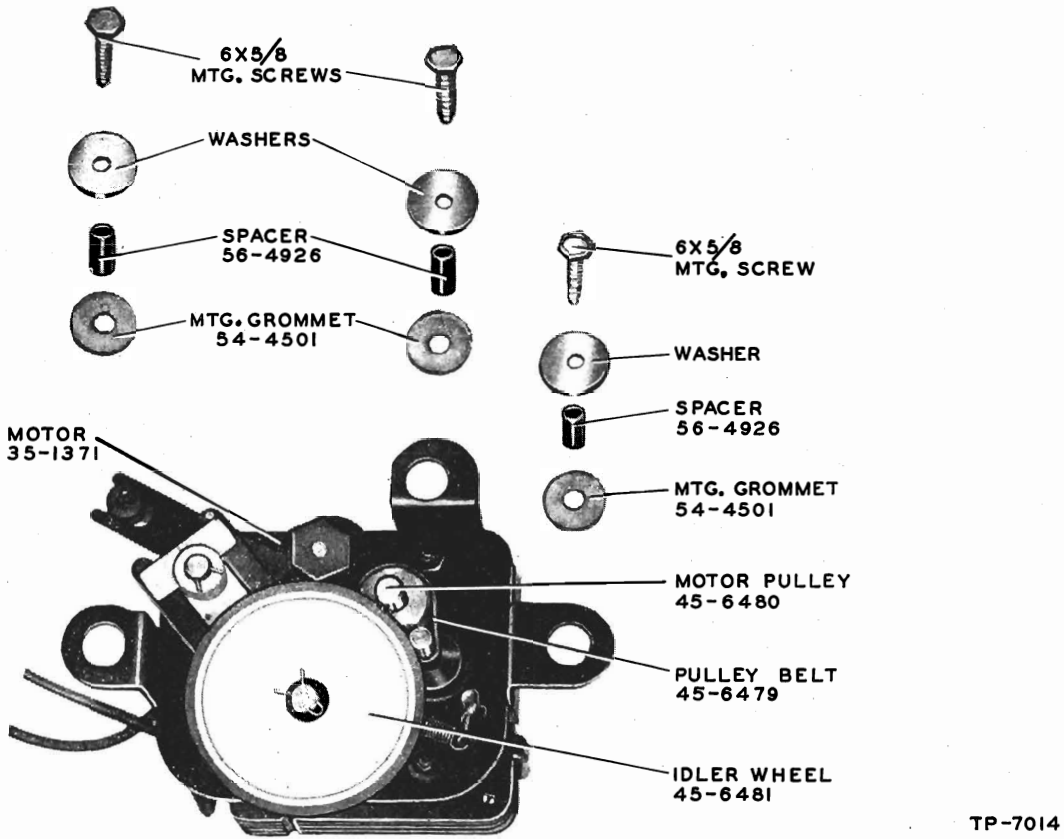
MOTOR ASSEMBLY (35-1371)
